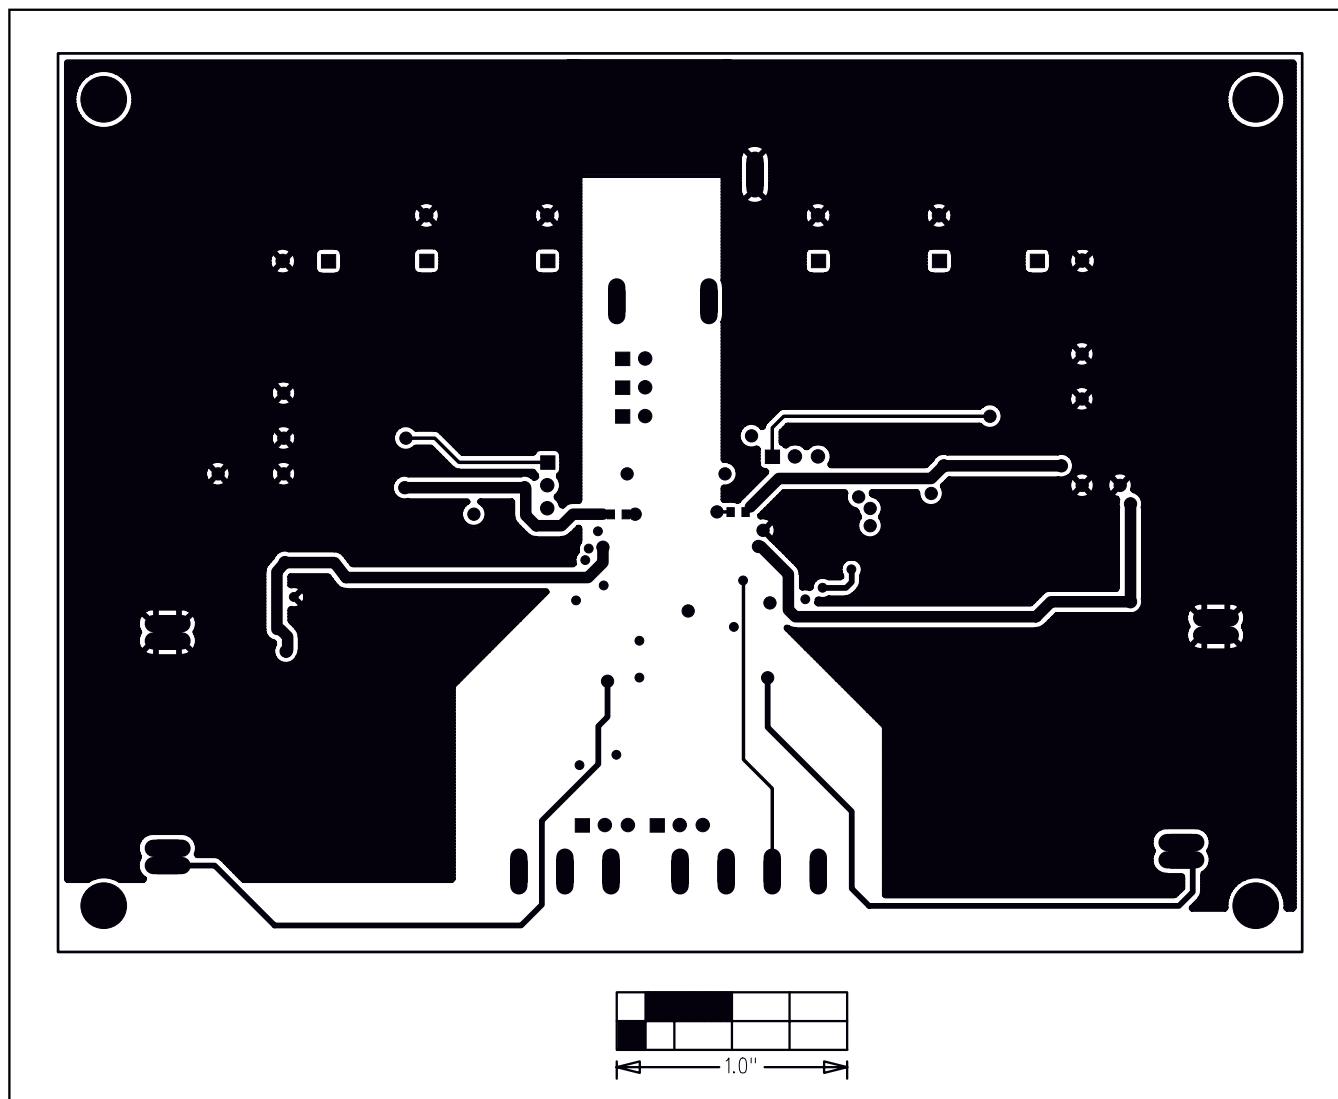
MAX8537 EV Kit PC Board Layout—Solder Side
